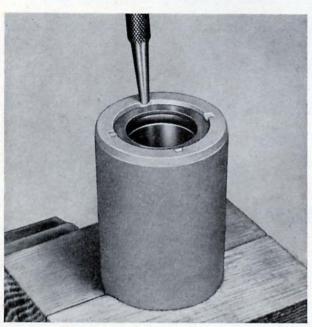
Staking the end of the drop arm shaft housing to secure oil seal washer
